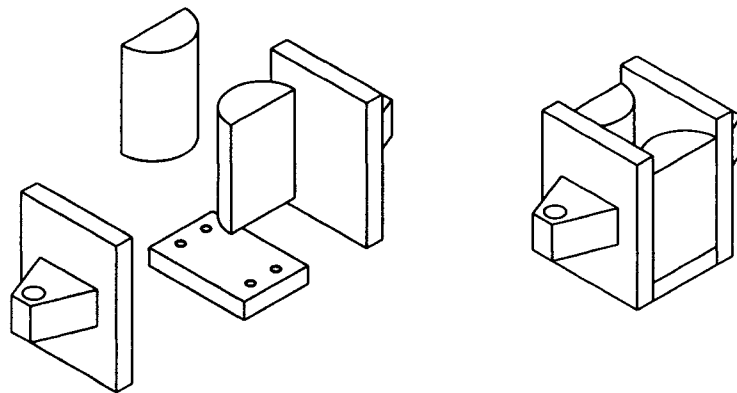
Regular, and 'Exploded' Views of the Tensile Specimen Mould
